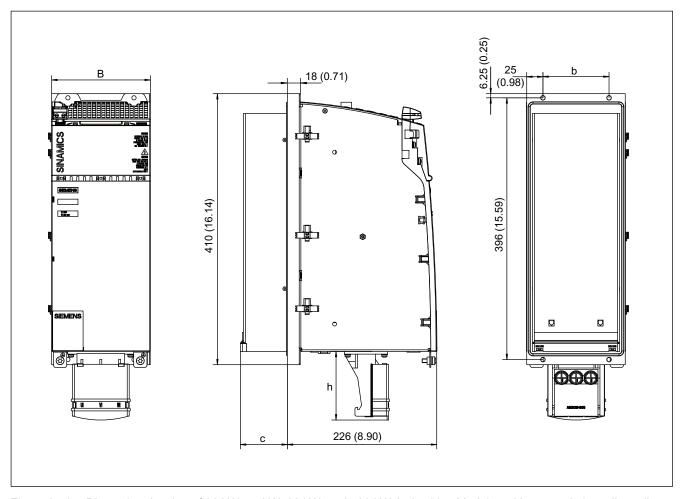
Dimension drawing of 36 kW, 55 kW, 80 kW, and 120 kW Active Line Modules with external air cooling, all dimensions in mm and (inches)
